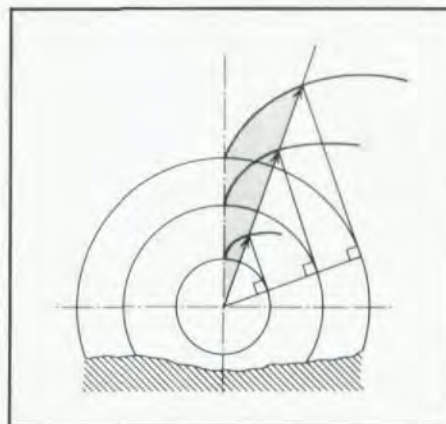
Geometric similarity of all involutes explains why the teeth of a large gear can mesh properly with those of a small gear.
